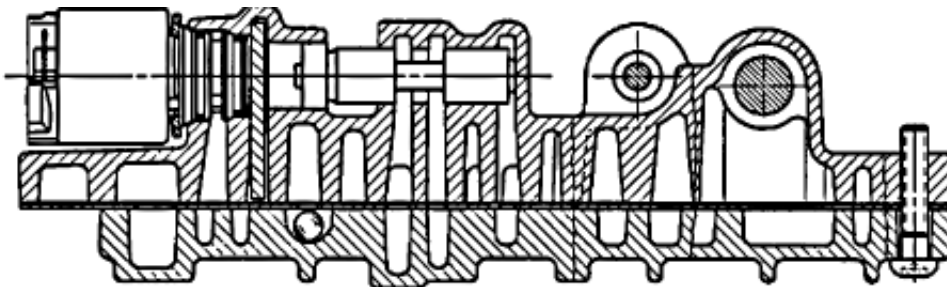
solenoid 2 and 2 – 3gear shift valve
